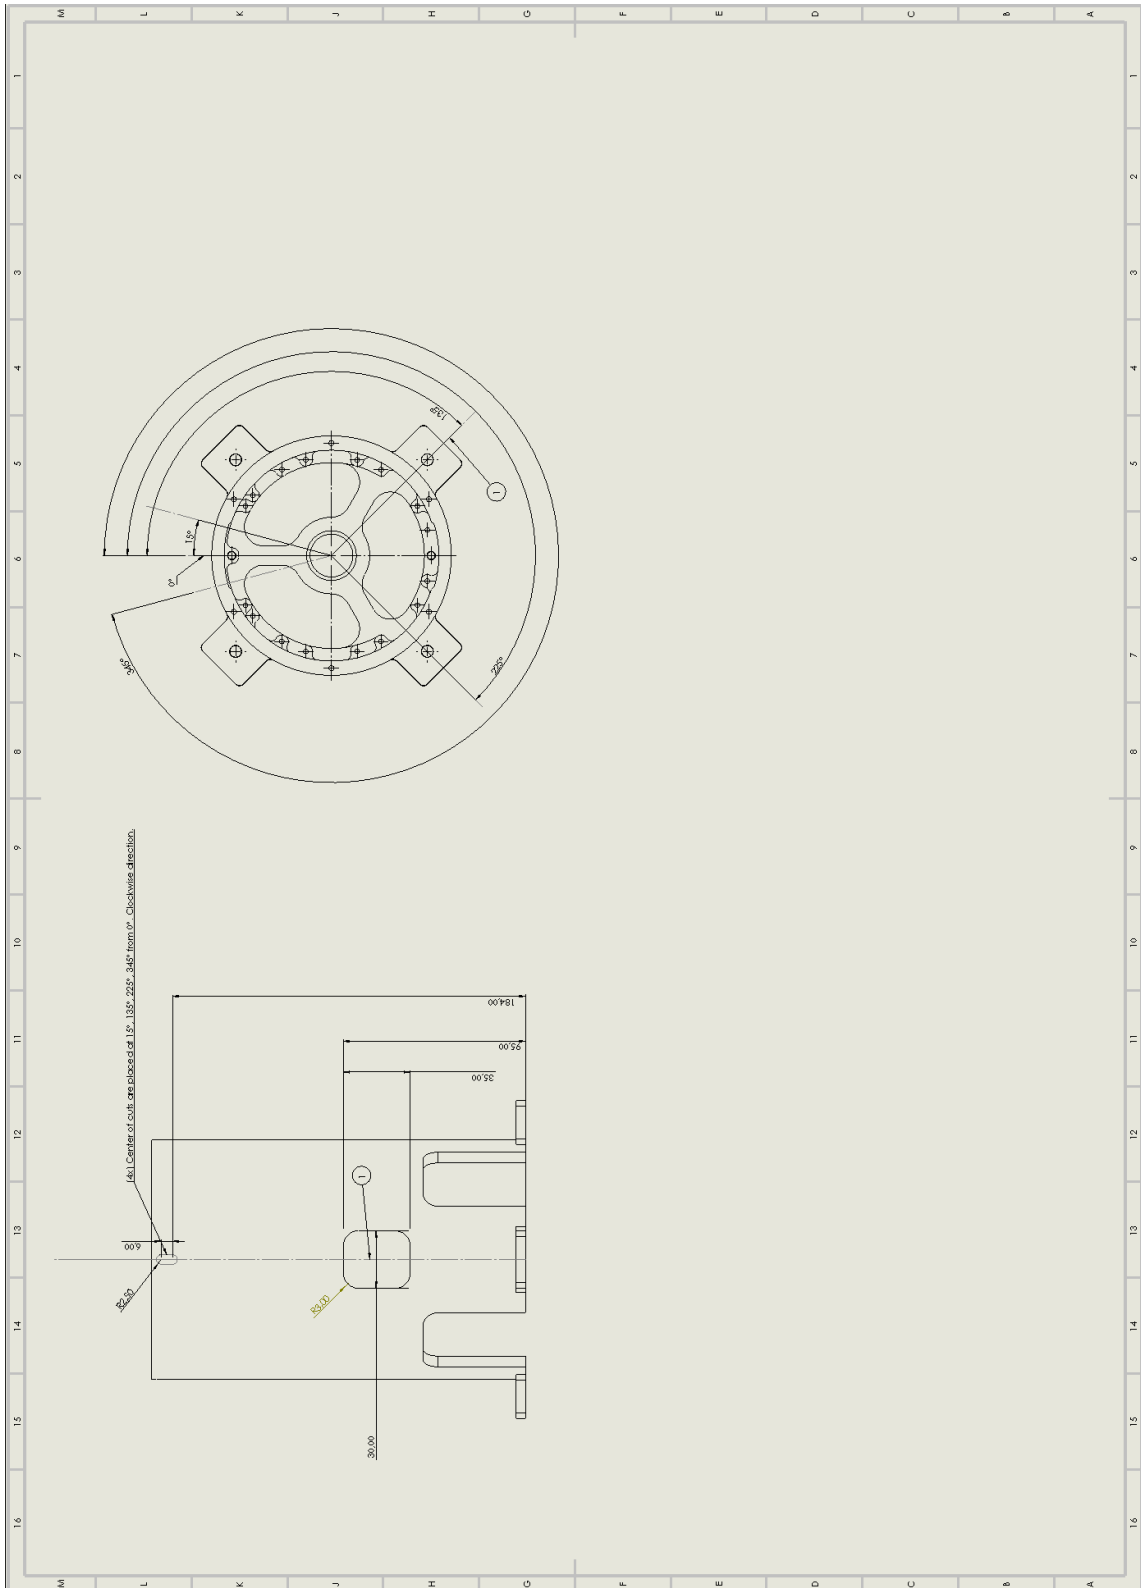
Housing measures and tolerances, sheet 4, 2D
